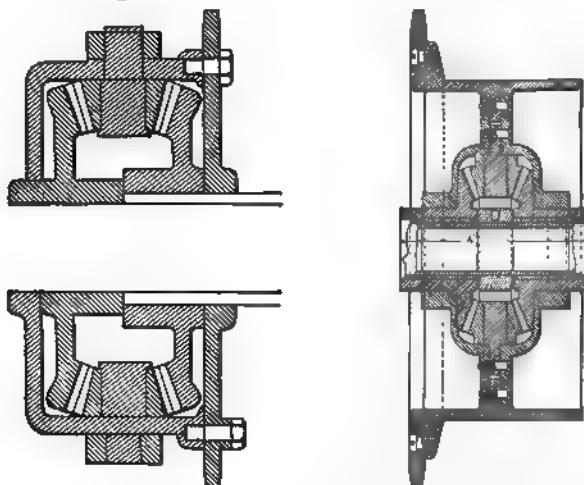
Section through the axis of a bevel gear differential train, showing two bevel pinions attached at top and bottom of the sprocket drum, and two bevel gear wheels one on the through axle shaft, the other on a rotating sleeve and through the axis of a bevel gear differential, showing two bevel gears keyed to rotating sleeves over an internal through axle or liner tube.
